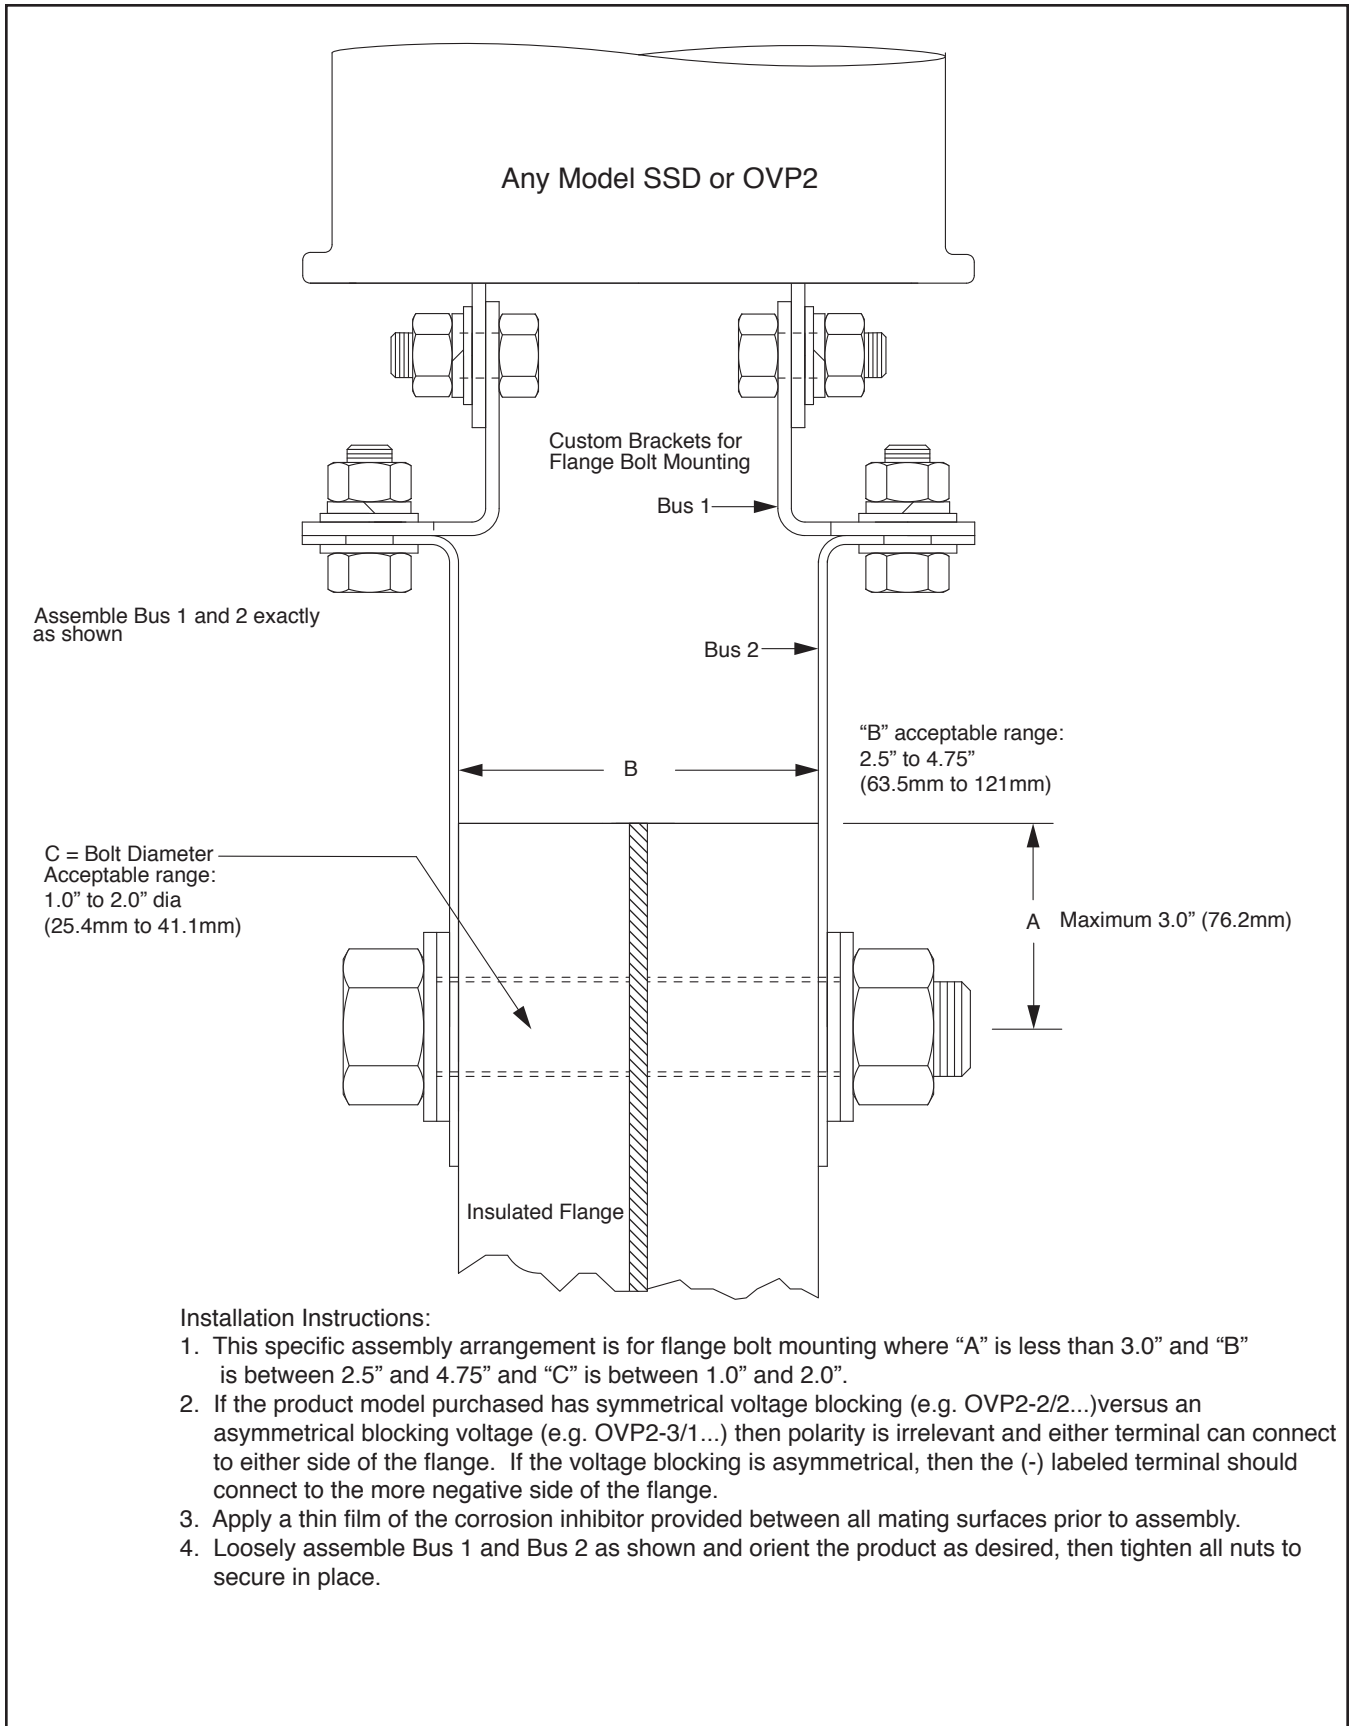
A Flange Mount Using Existing Flange Bolts
